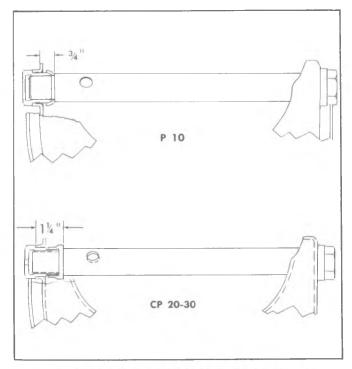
C-20-Positioning L.C.A. Shaft (Steel Bushings)
